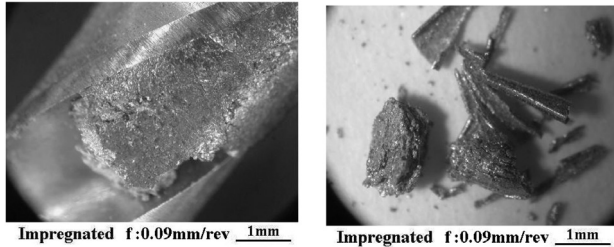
Photograph of drill groove which is filled with chip, and blocked chip (TiN)
